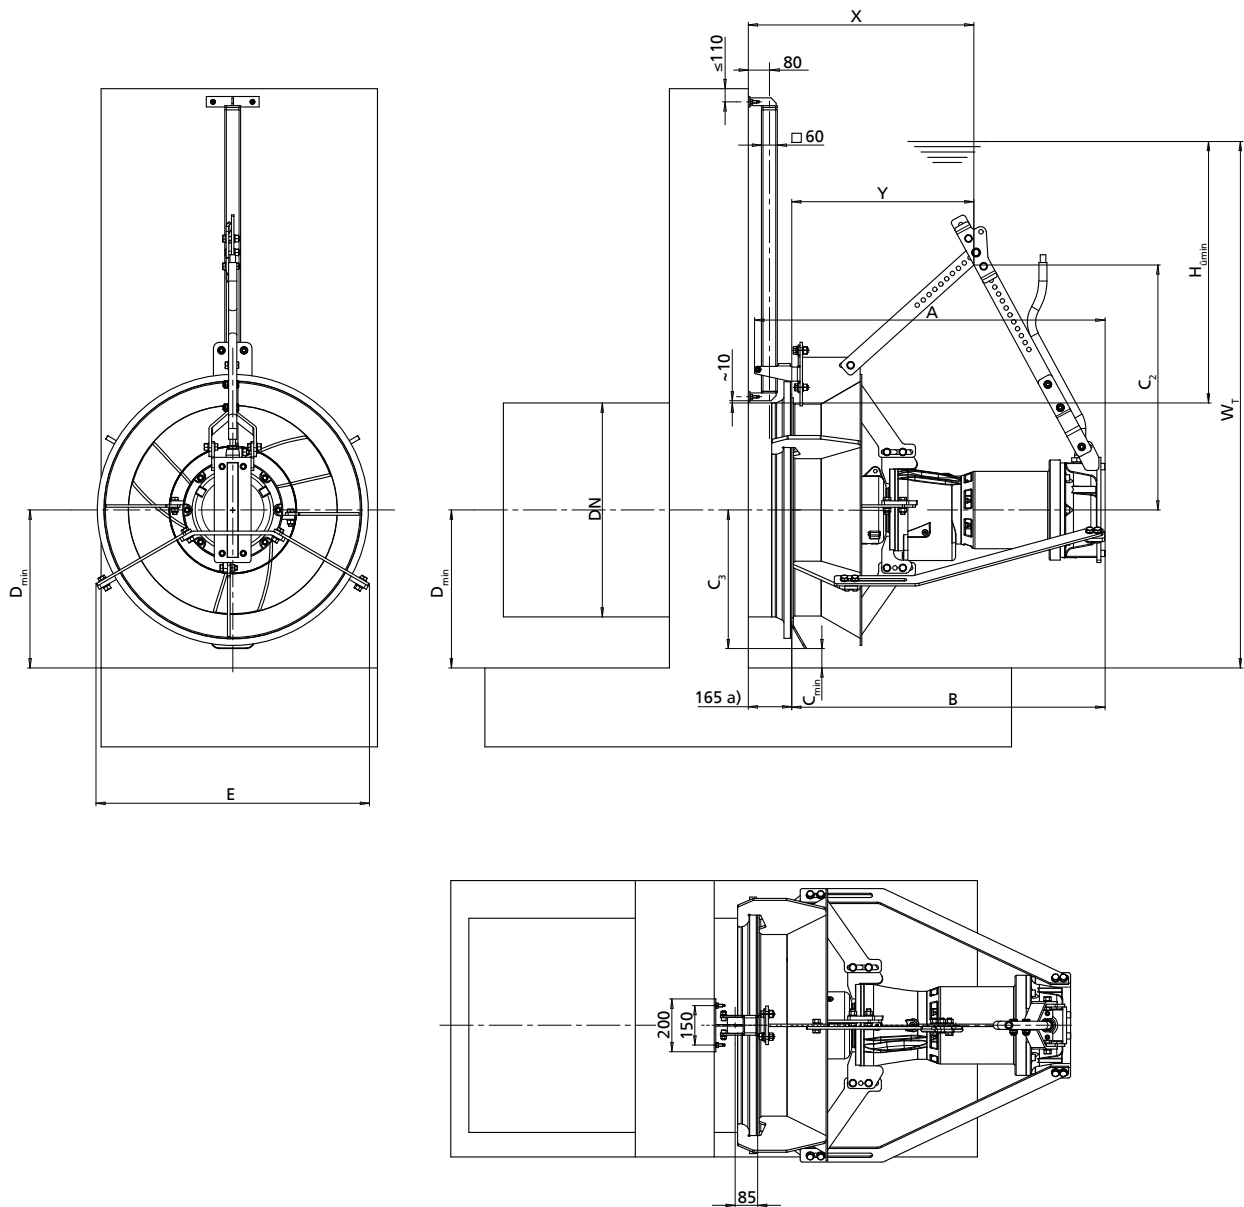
Dimensions of an Amaline 500, 600, 800; motor housing made of grey cast iron
